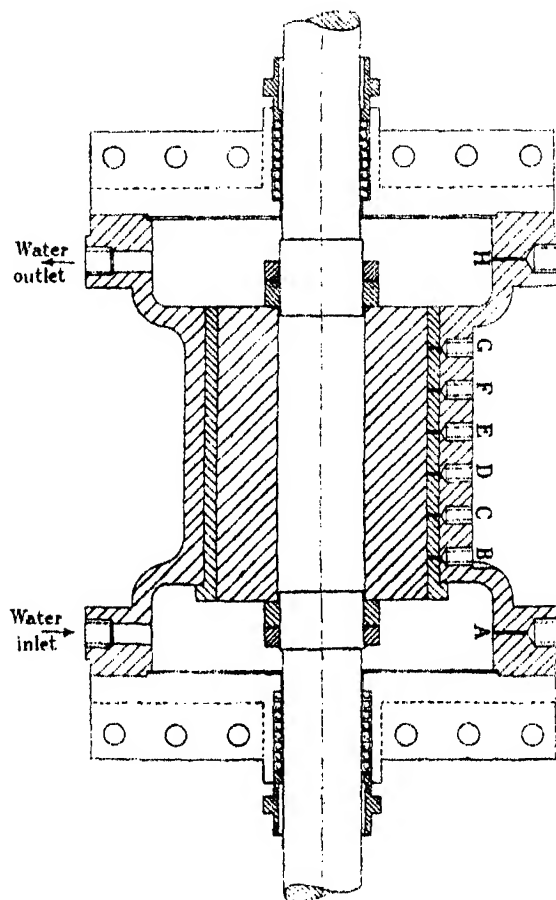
Sectional plan of apparatus II, with top half of end-covers removed.
